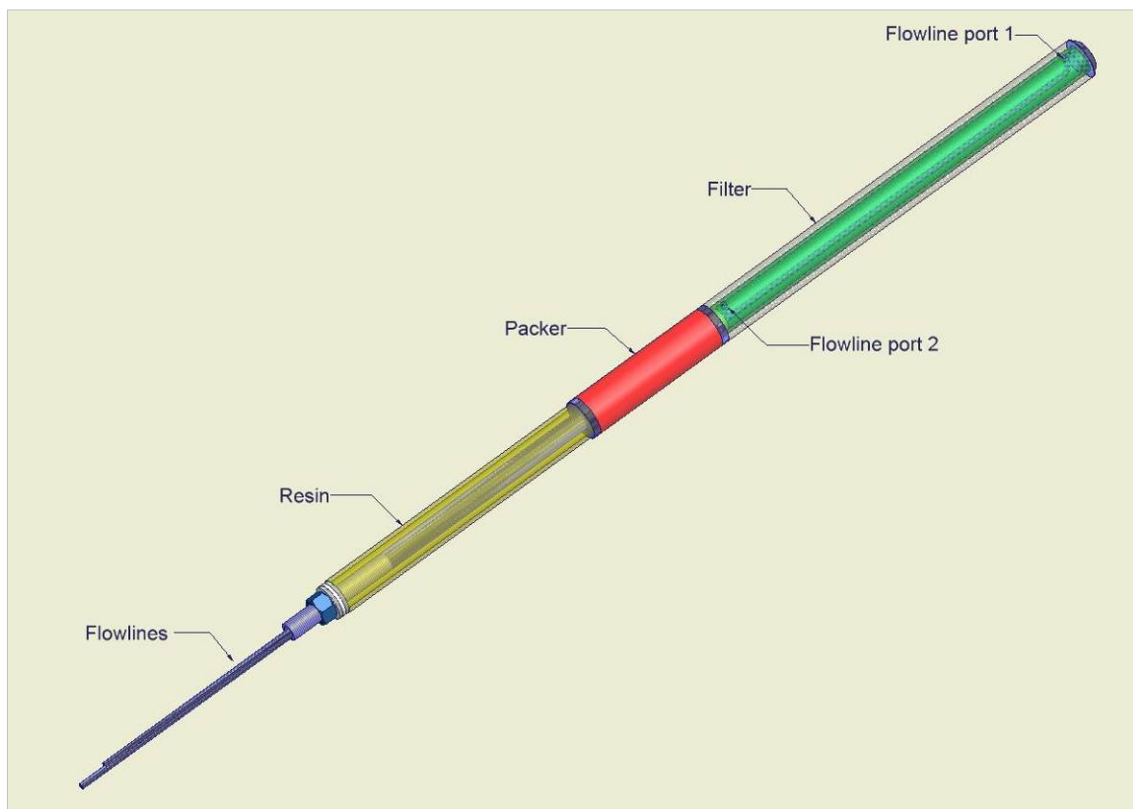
Generalized 3D drawing of Solexperts Mini-Piezometer System.
